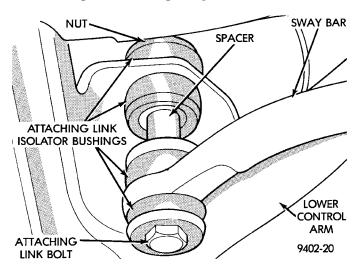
Stabilizer Bar Attaching Link Assembly Bushing Orientation
